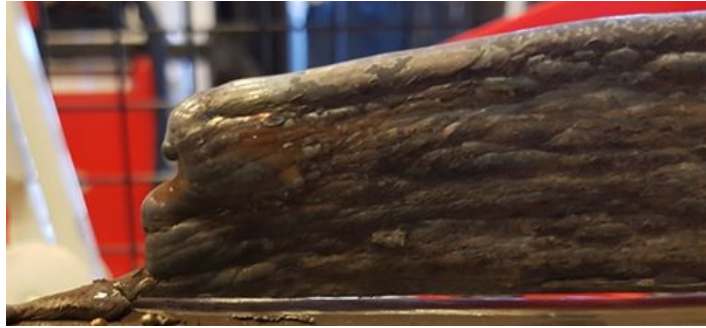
TWS cut from the baseplate and reassembled at the fracture area. Source: Picture from welding experiment
